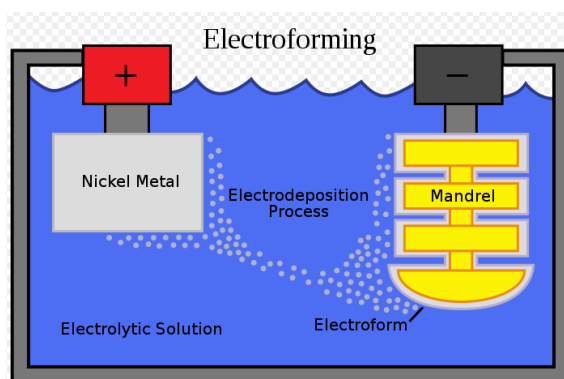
Schematic drawing of electroforming process ^[65].
